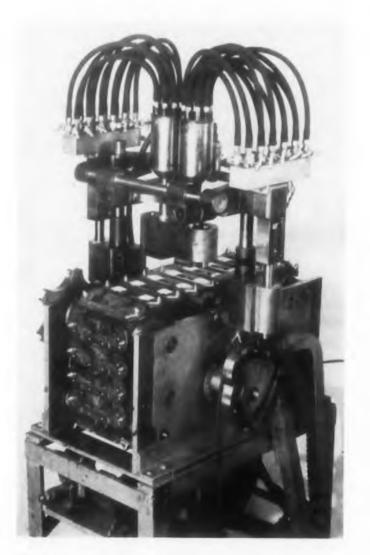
Injection molding resistor printing machine, Conveyor pauses under the printing head.
